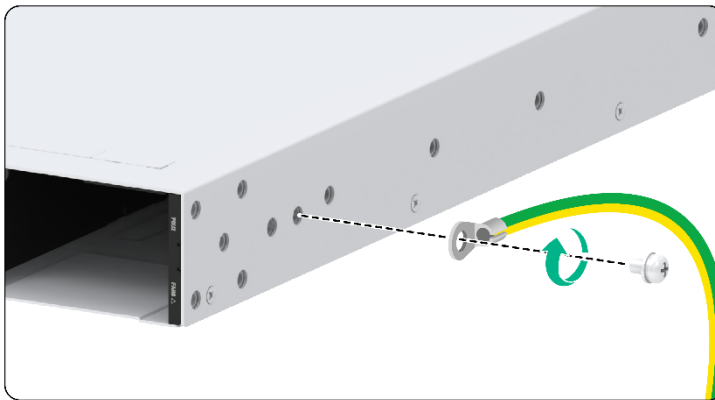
Connecting the grounding cable to an S9855-40B switch
